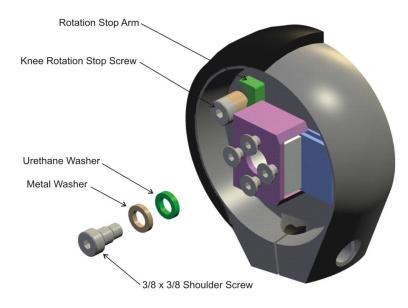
Knee slider assembly and lower leg rotation stop
